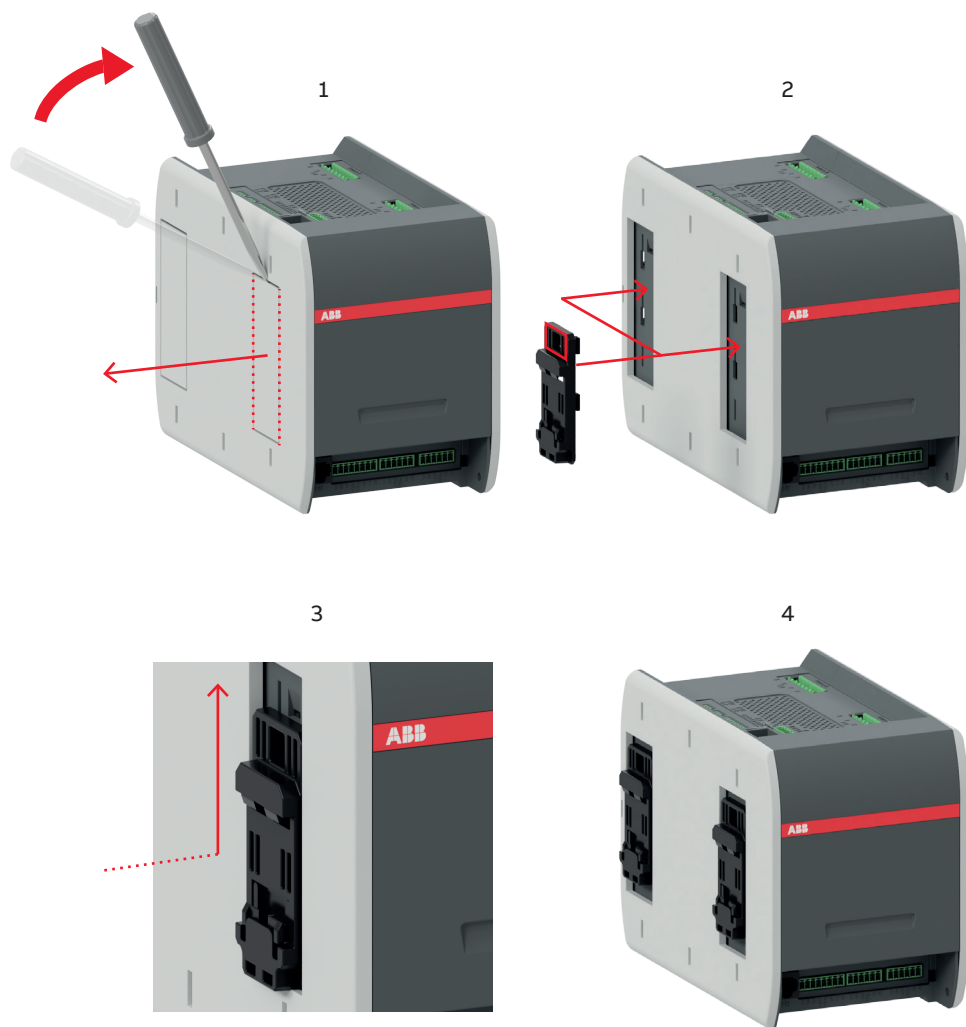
Mounting the DIN-rail mounting adapter OXCO1D on the side of ATS Controller OXCO\_, suitable for installation on either the right or left side.
